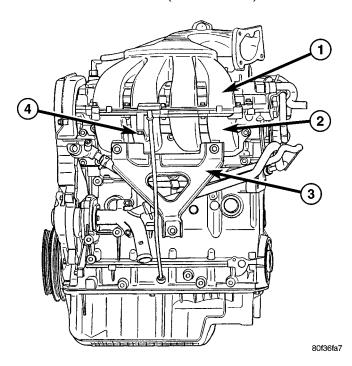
Lower Intake Manifold Support Bracket - 2.4L Turbo
